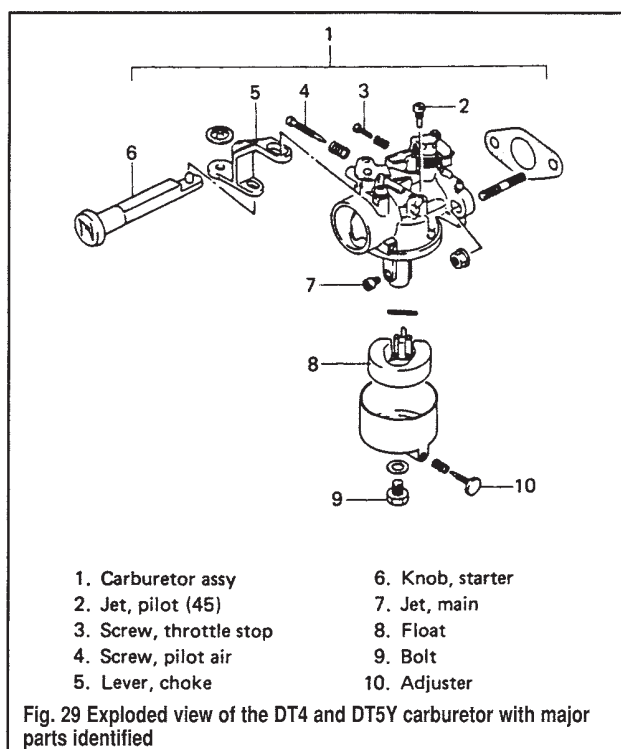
Exploded view of the DT4 and DT5Y carburetor with major parts identified
